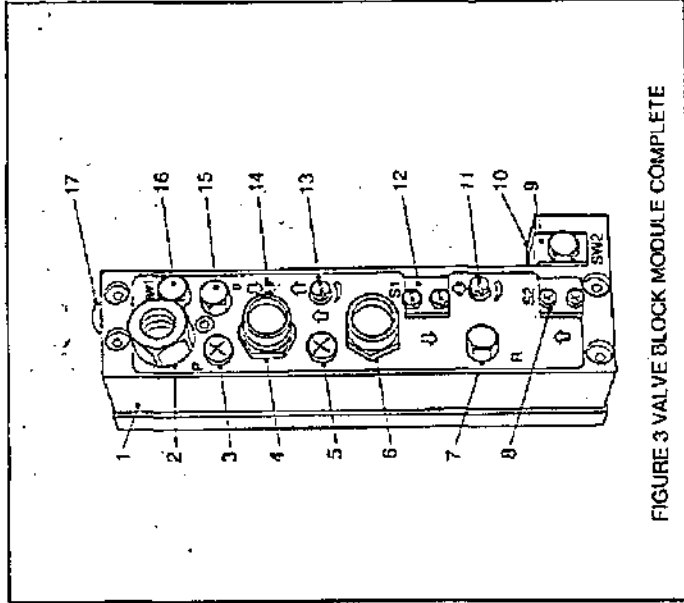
VALVE BLOCK MODULE COMPLETE
